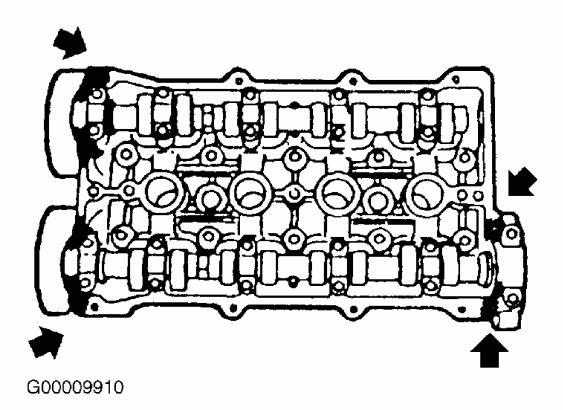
Applying Sealant To Cylinder Head (Miata) Courtesy of MAZDA MOTOR CORP.
